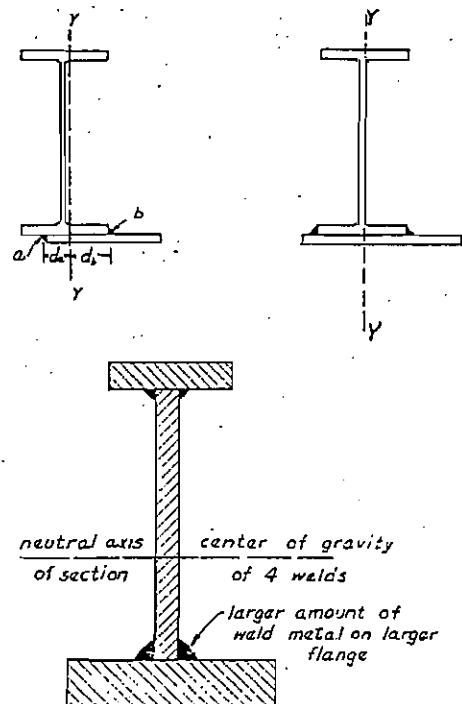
Where welds are not balanced about the neutral axis of the section, distortion can be minimized by welding first the joint nearest the neutral axis and then the joint farthest from the neutral axis. Similarly, weld sizes may be varied to help balance forces.
